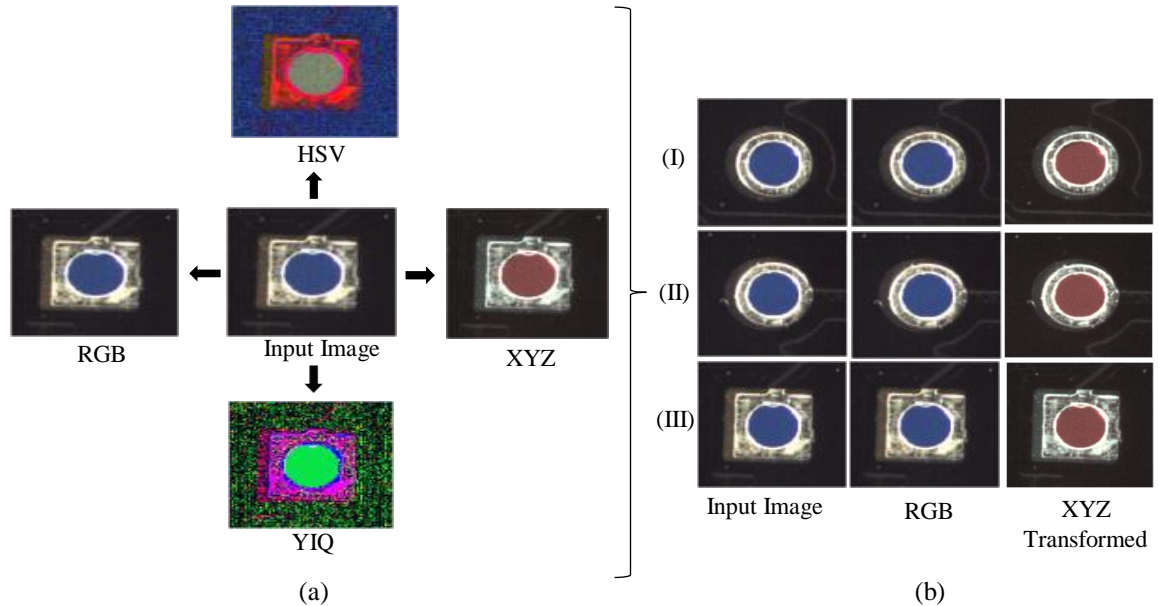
Colour space transformation of a tin-plated solder pad on black PCB. (a). Results from four prominent models for this combination. (b). Resulted images after RGB and XYZ colour transformation. (I). Solder pad without a PCB track. (II). Solder pad with a PCB track. (III). Solder pad with an offset with the PCB surface
